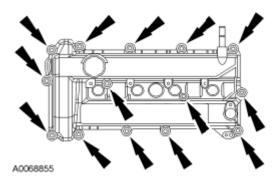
Locating Valve Cover Retainers Courtesy of FORD MOTOR CO.
